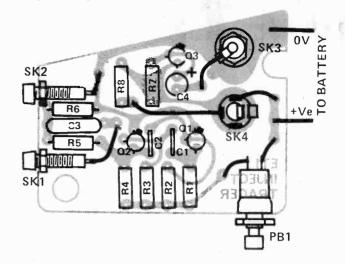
Component overlay. Note that SK2 and SK1 are held in place by the Verobox closing around them. SK3 and SK4 are attached directly onto the pcb, and face out of the box on the copper side of the board.
